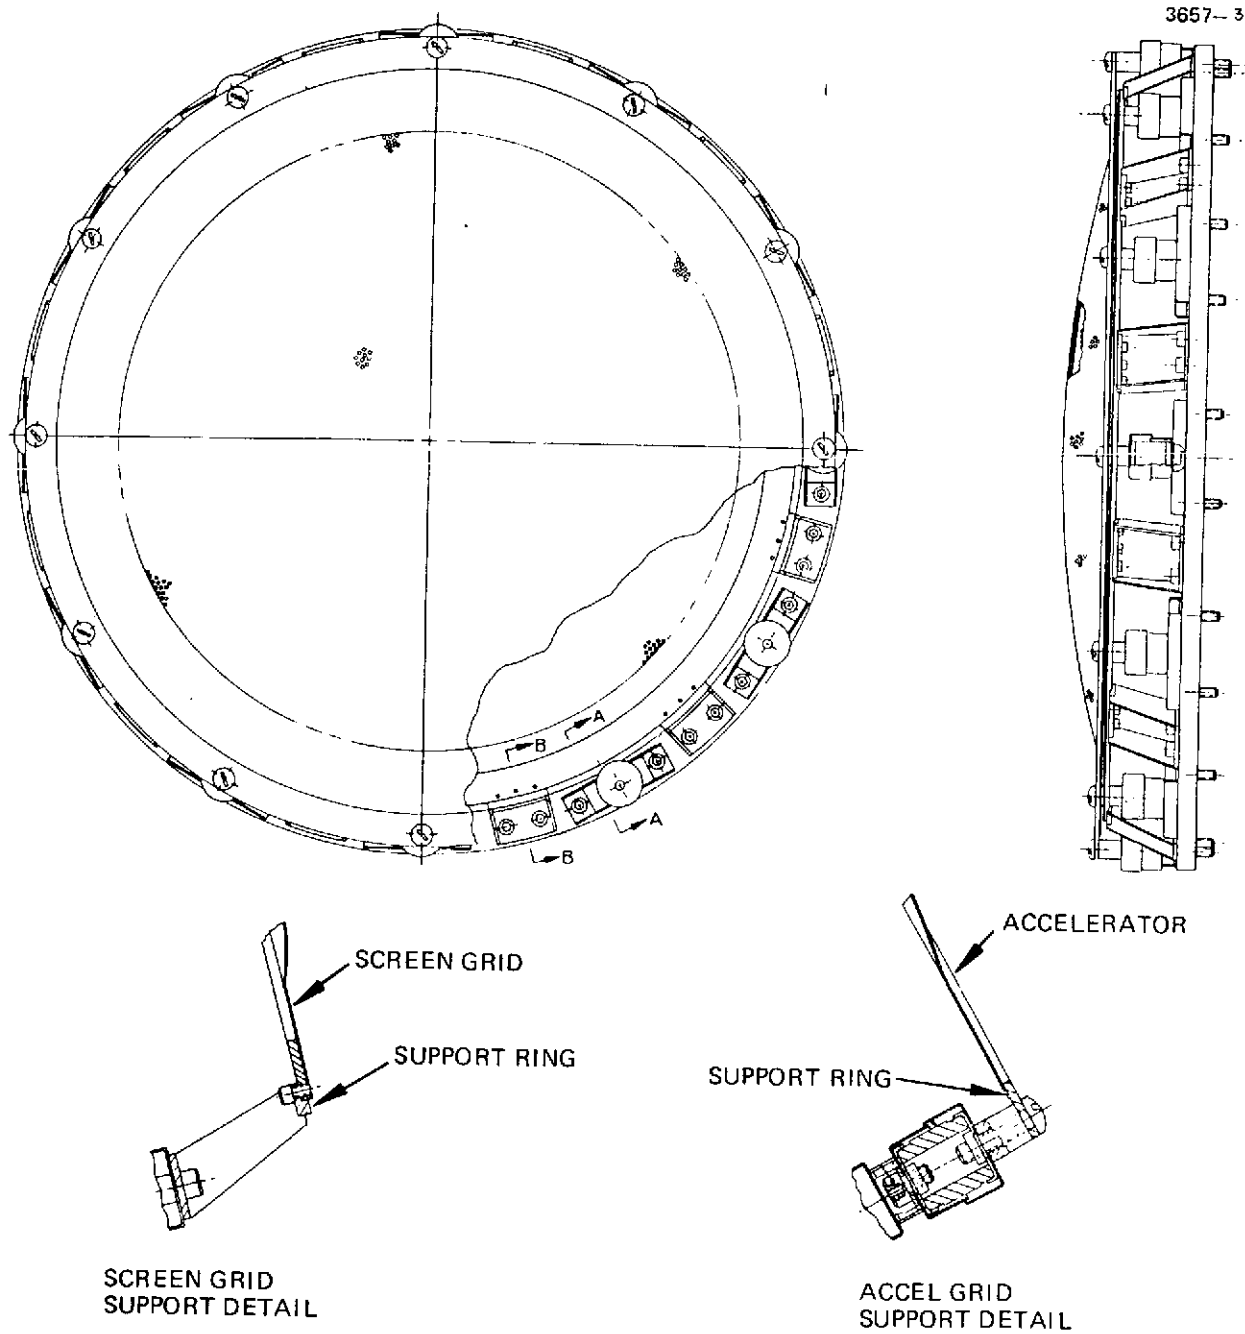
700-series thruster dished grid ion optical system assembly.
